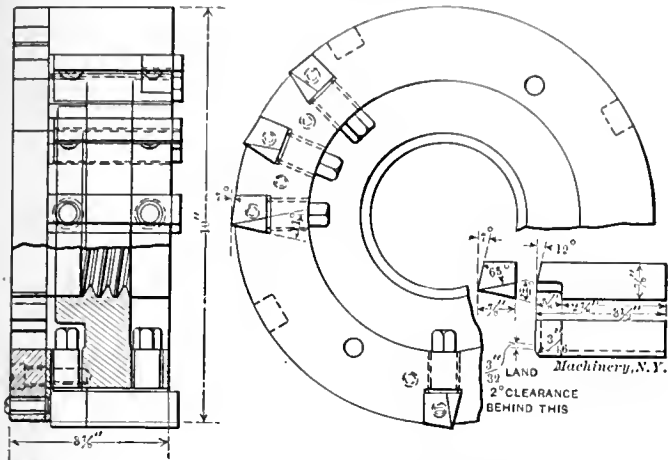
Ten-inch, 16-blade Cutter used in Experiments on Milling Cutters.
